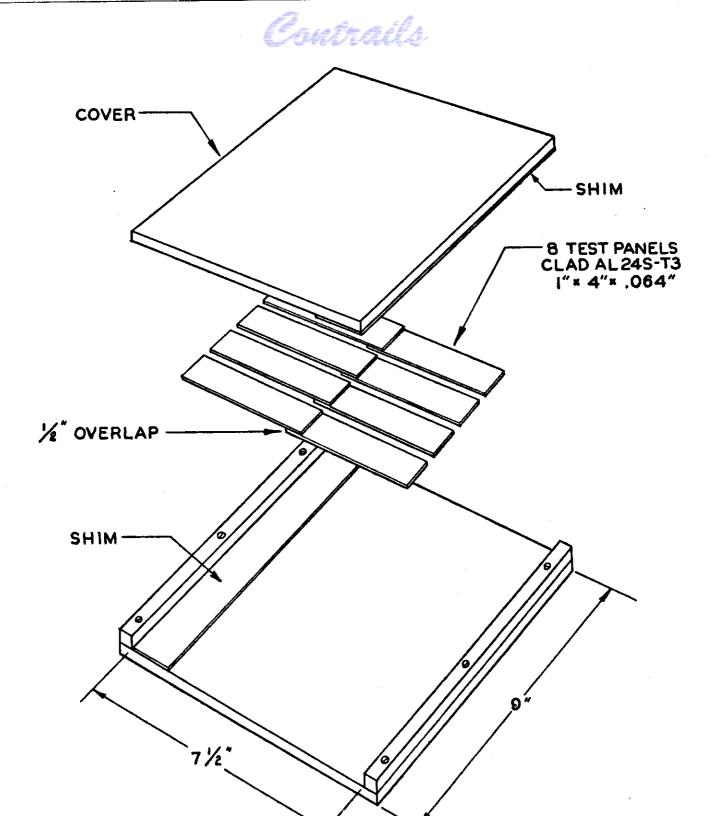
JIG FOR ASSEMBLING SHEAR PANELS
